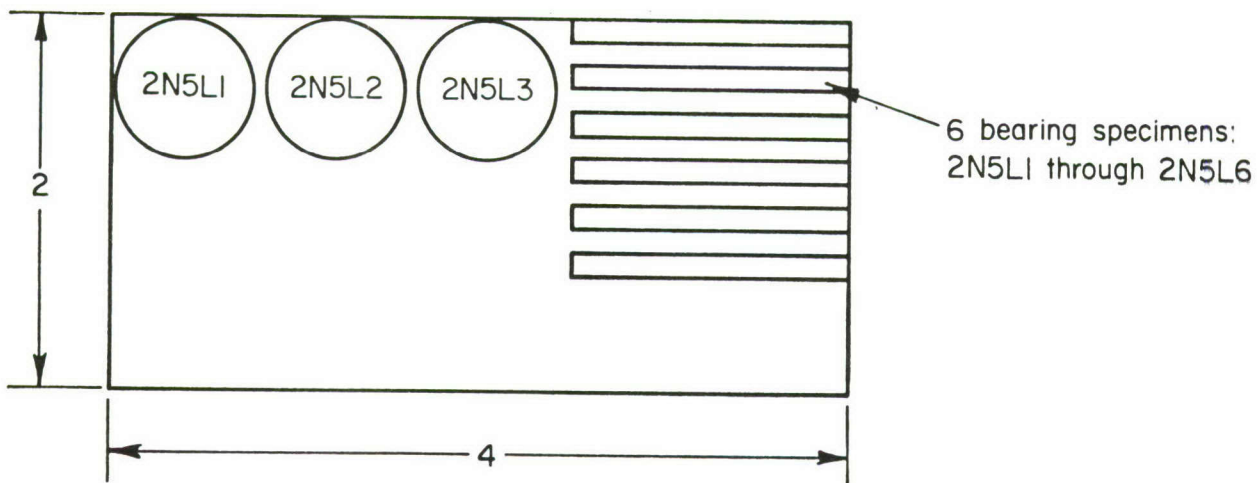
LOCATION OF TEST SPECIMENS FOR
